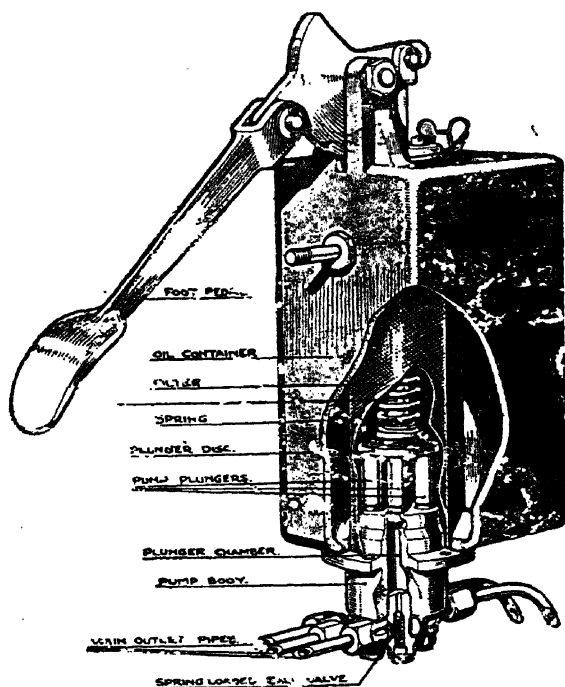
Tecalemit Pedal-Operated Chassis Oiling Device.
